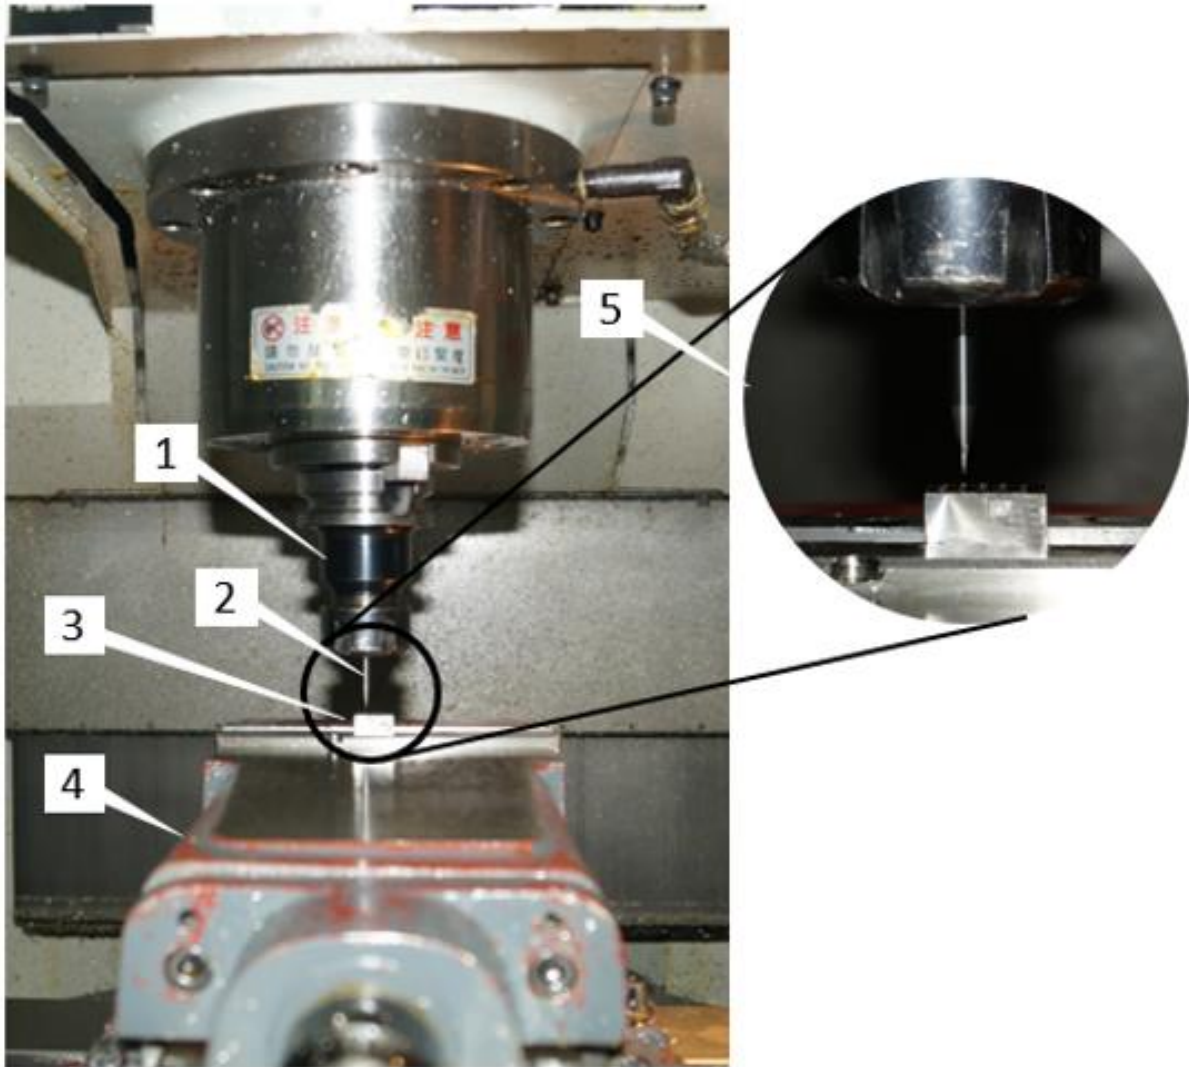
Experimental Setup (1) Spindle; (2) Micro-end mill; (3) Workpiece; (4) Machining vise; (5) Magnified view of tool and workpiece
